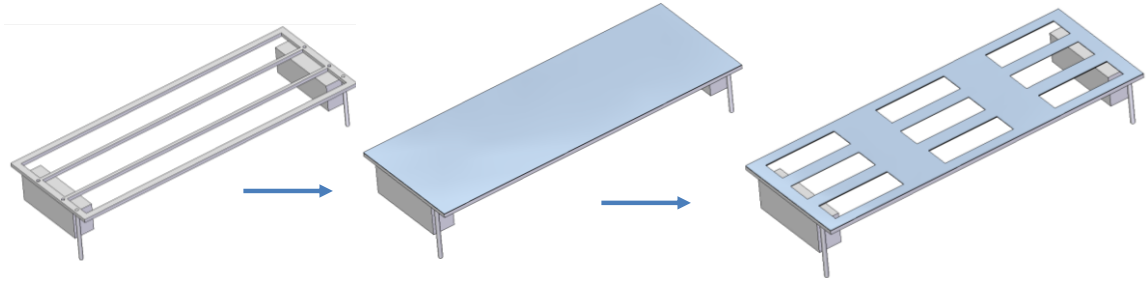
Machining fixture for producing HTPM laminate test samples.
